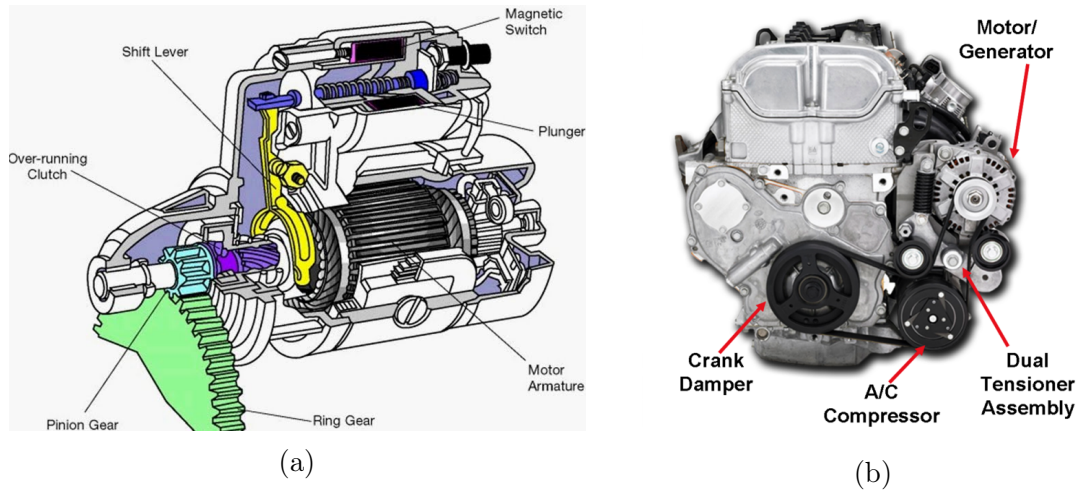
Types of Starter Motors: (a) Ring Gear Starters and (b) Belt-Integrated Starter Generator
